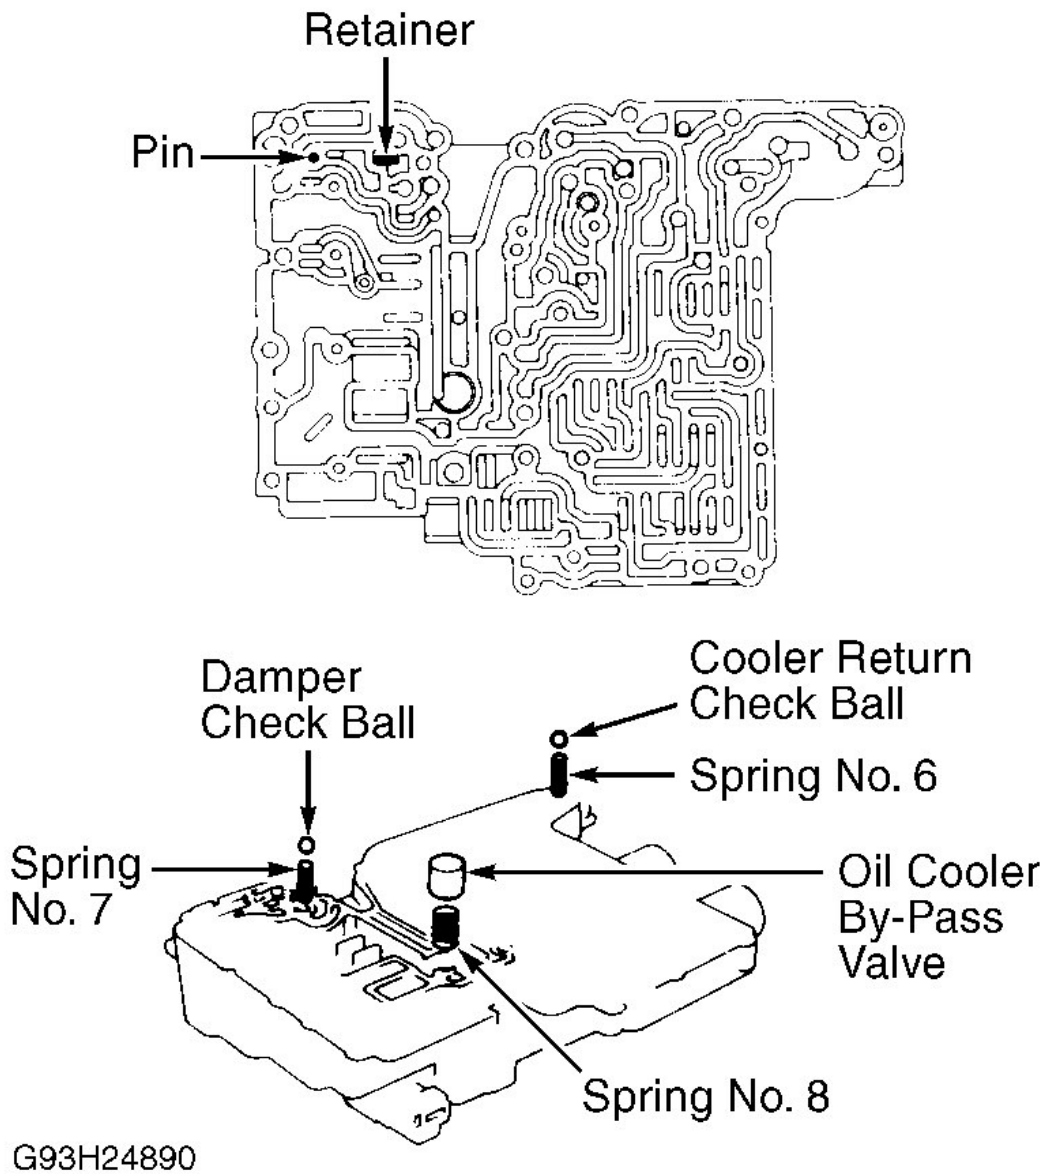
Identifying Lower Valve Body Check Ball Pin, Spring & Retainer Locations
